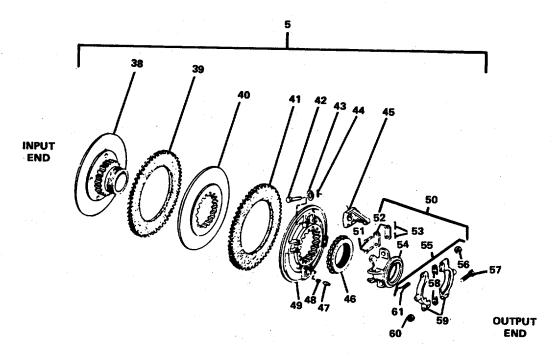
Friction Clutch Assembly Repair (Sheet 2 of 2).
